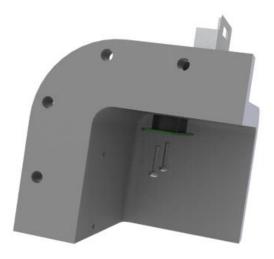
ML II/ RCU II EXL W&M Assembly
